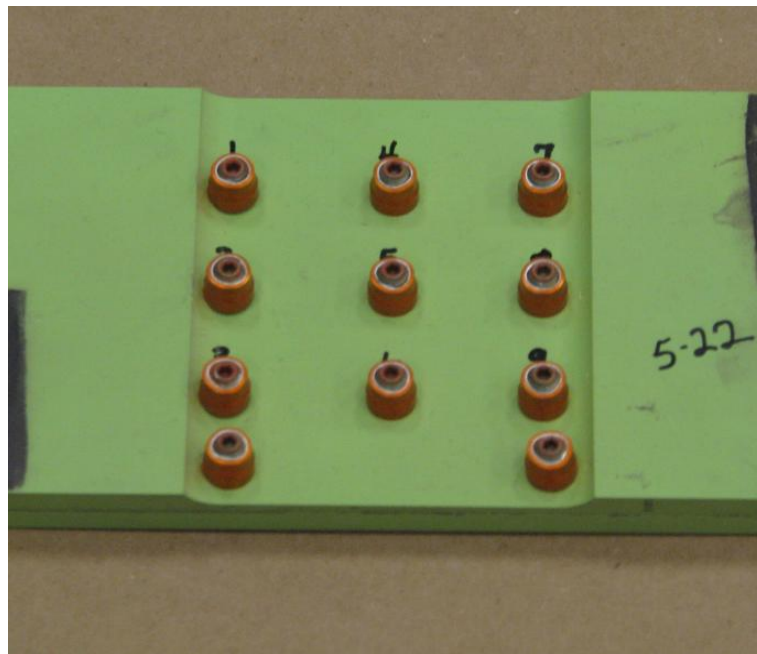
Pre-Test Stress Corrosion Test Specimen
